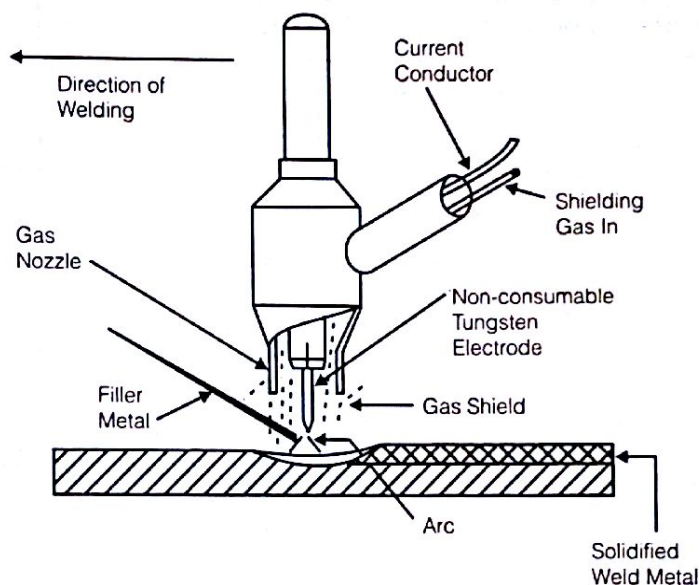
Tungsten inert gas welding (TIG)
